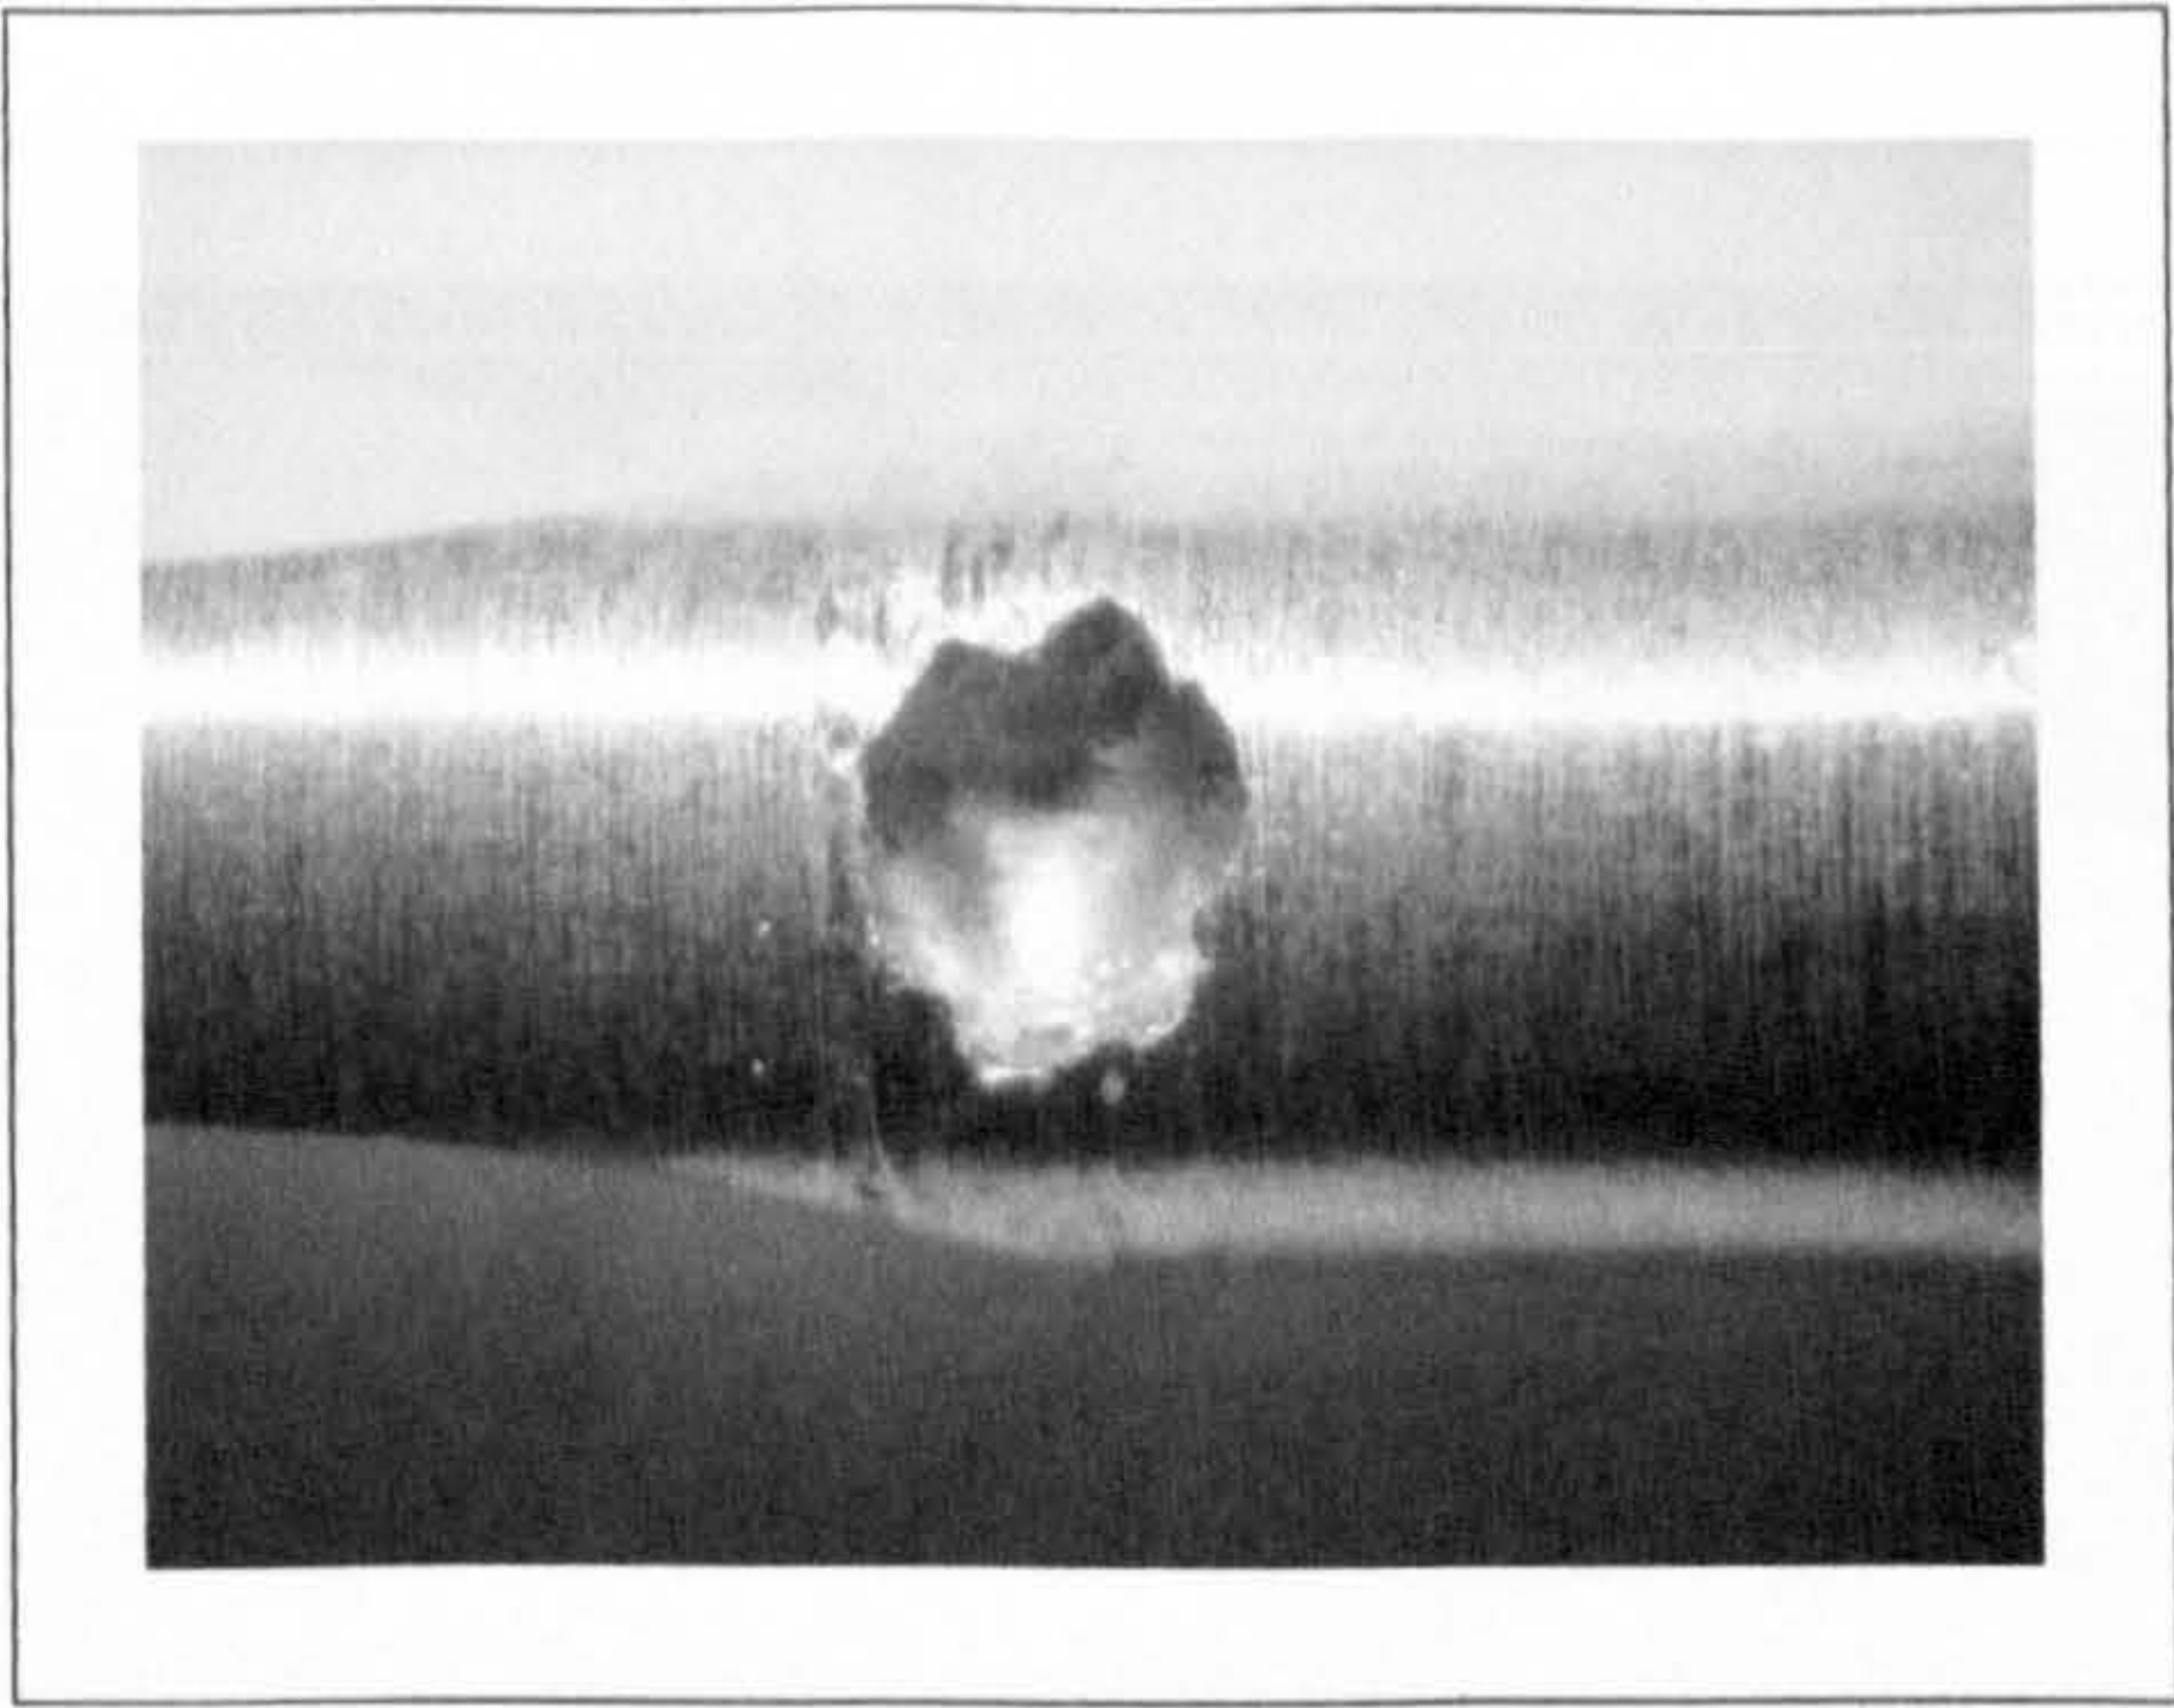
Pore within the weld metal of a small crack growth specimen.
